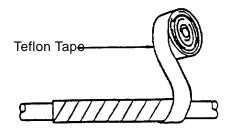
RF Cable Solder Method Repair (Sheet 2)
